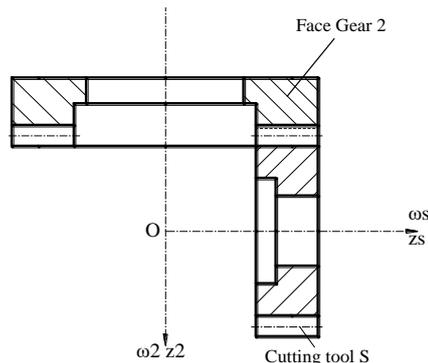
Schematic diagram of processing gear of orthogonal face gear
